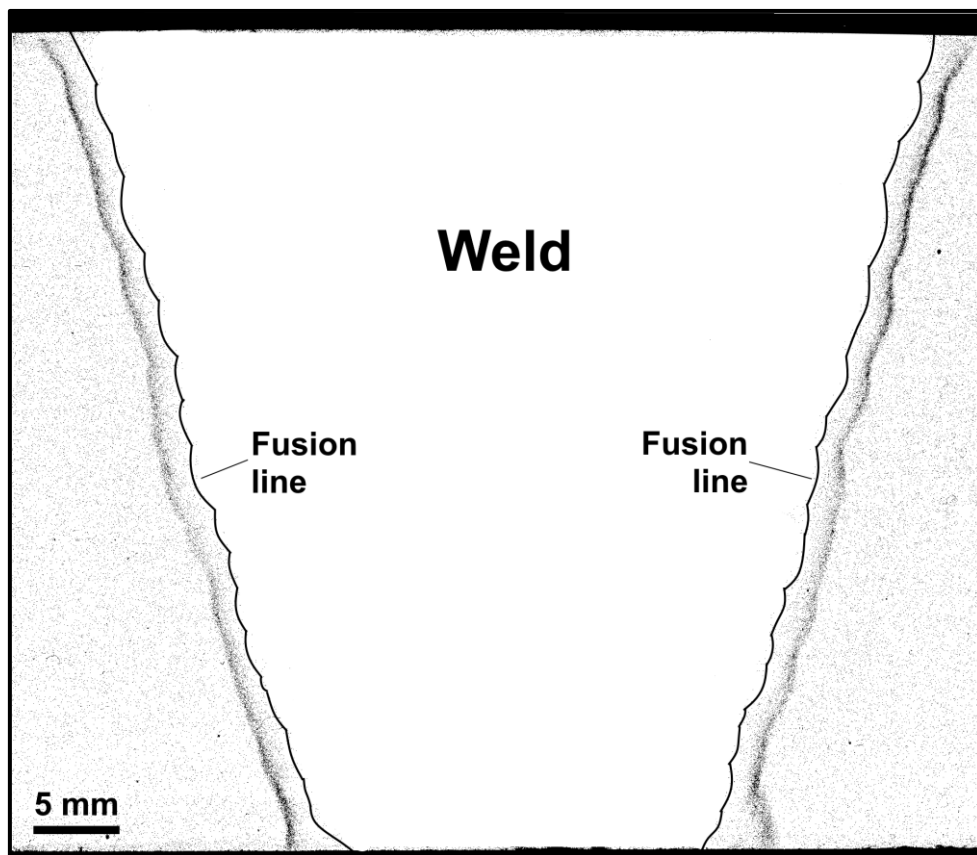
Macro-image of damage in feature-type cross-weld test sample RNT-B2-4
